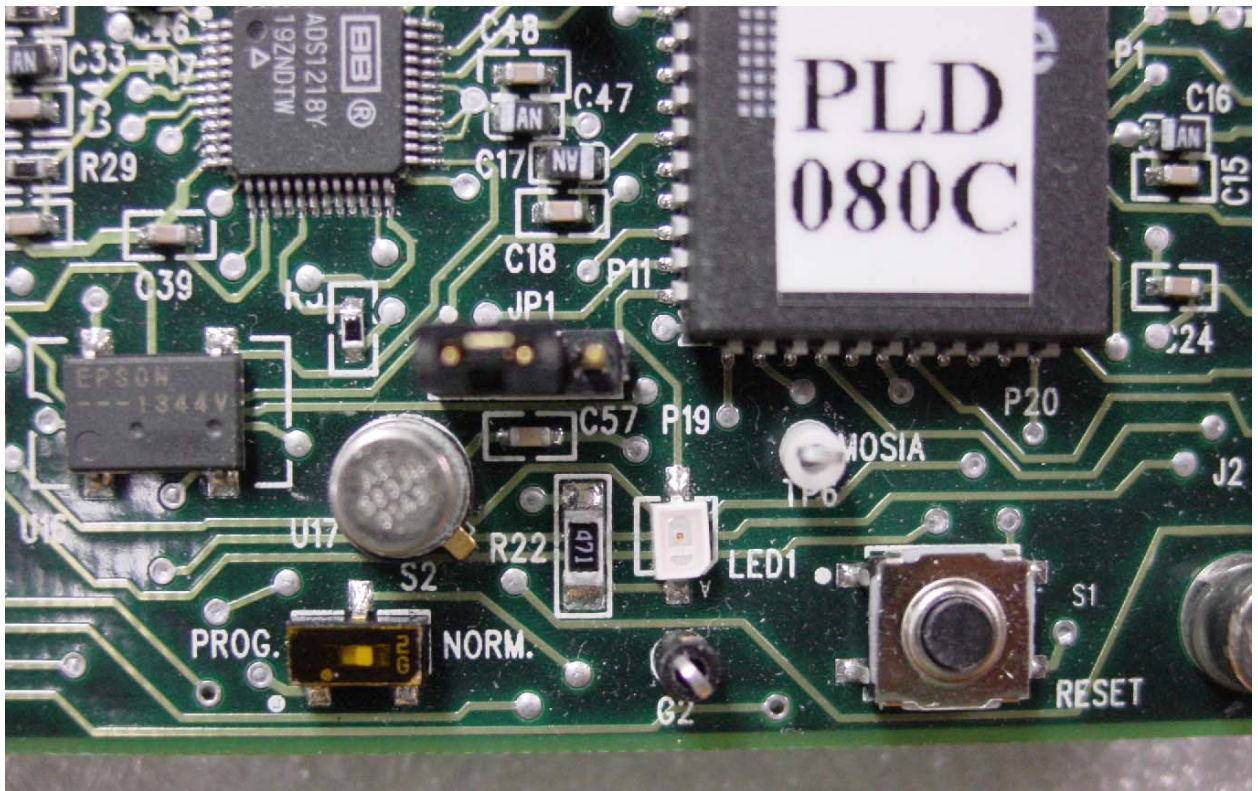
Lower right-hand section of Auxiliary Input Board showing Prog/Norm switch.
